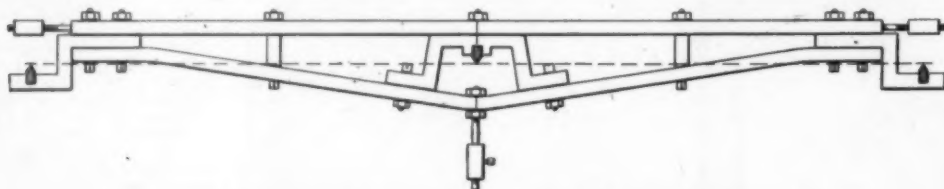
THE COMPLETED BEAM WITH TRIAL ADJUSTMENT.
